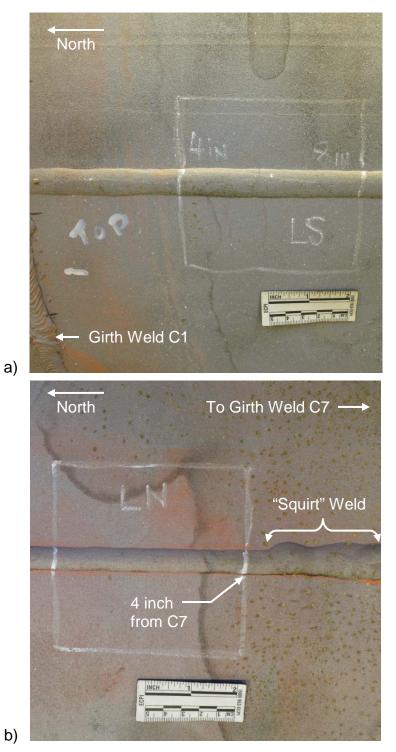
a) Outer weld bead on the long joint south of pup 1. There was no apparent "squirt" weld adjacent to girth weld C1; b) Outer weld bead on the long joint north of pup 6. There was an apparent "squirt" weld adjacent to girth weld C7. The photographs are taken after grit blasting and magnetic particle inspection and prior to sample removal for cross-section metallography.
